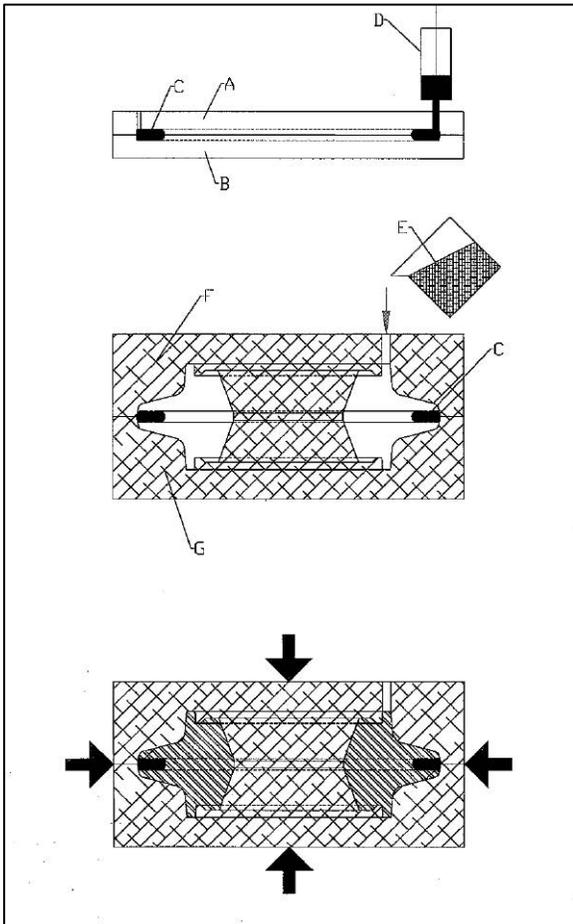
Proposed disc cutter manufacturing approach. A: top half die; B:bottom half die; C: paste made of nanosized hard material and a binder; D: injector to push the hard material paste into the die, forming a ring; E: powdered body material is charged into the sand mold with the hard material ring positioned in place; F: cope; G: drag; and the sand mold with a hard material ring and powdered body material inside is heated and pressed to produce the proposed disc cutter.
